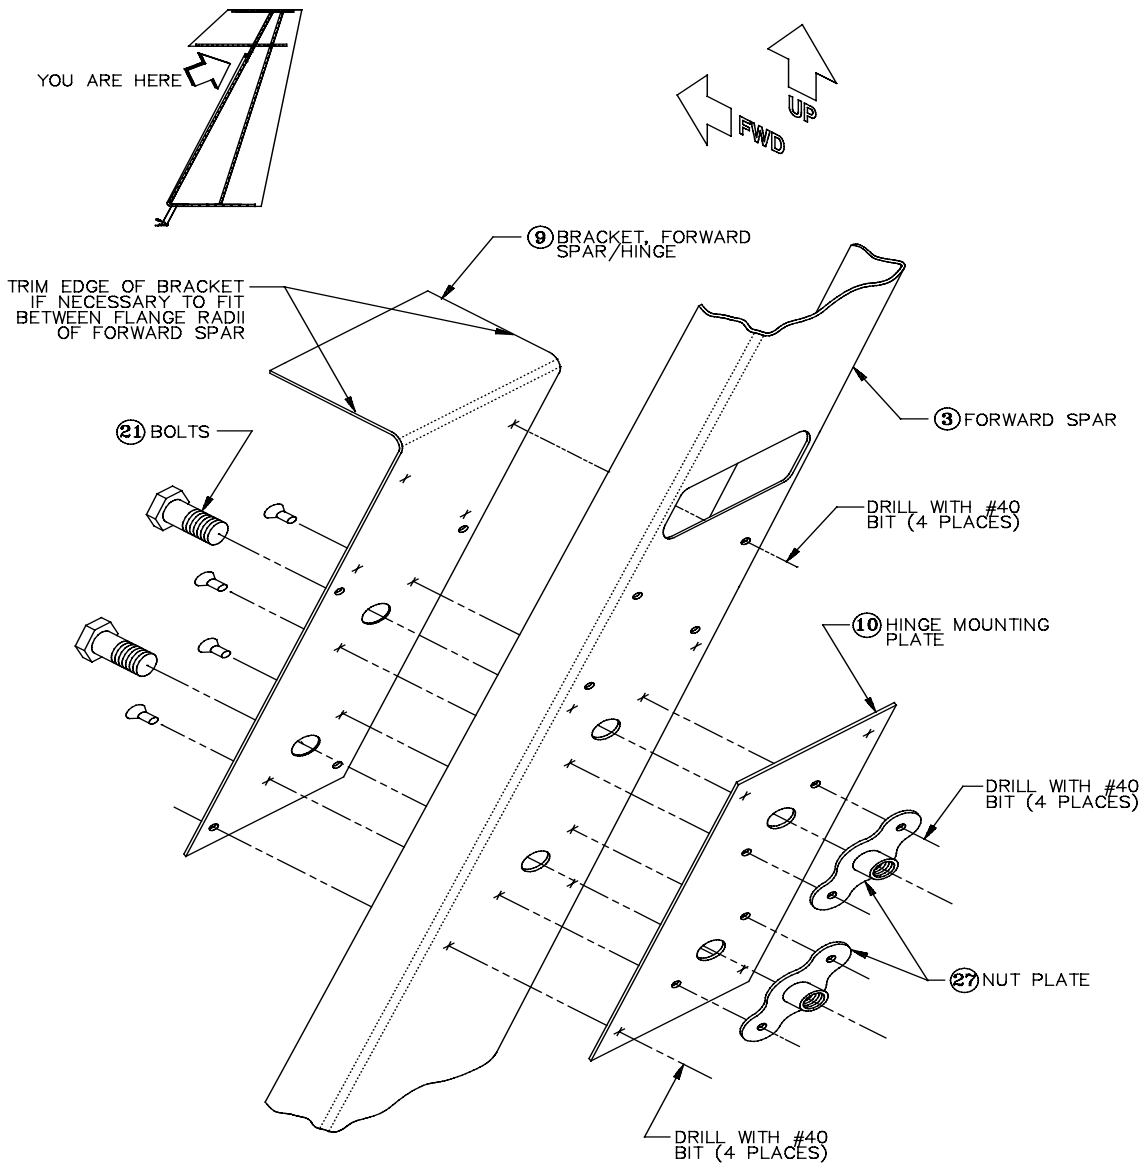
Hinge Mounting Plate and Forward Spar/Hinge Bracket Assembly
